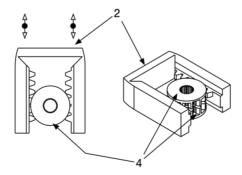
Sliding element gearing mechanism which allows symmetrical and asymmetrical movement [24]
